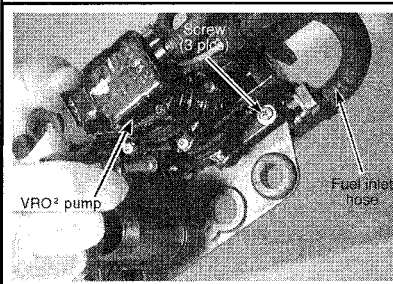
Install the VRO2 pump using new O-rings on the fitting
